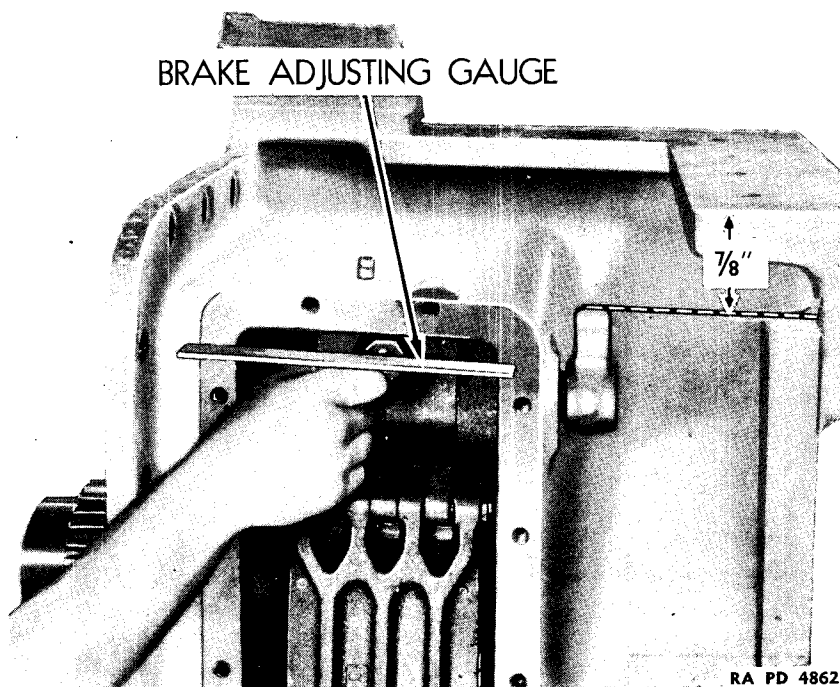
CHECKING BRAKE ADJUSTMENT
